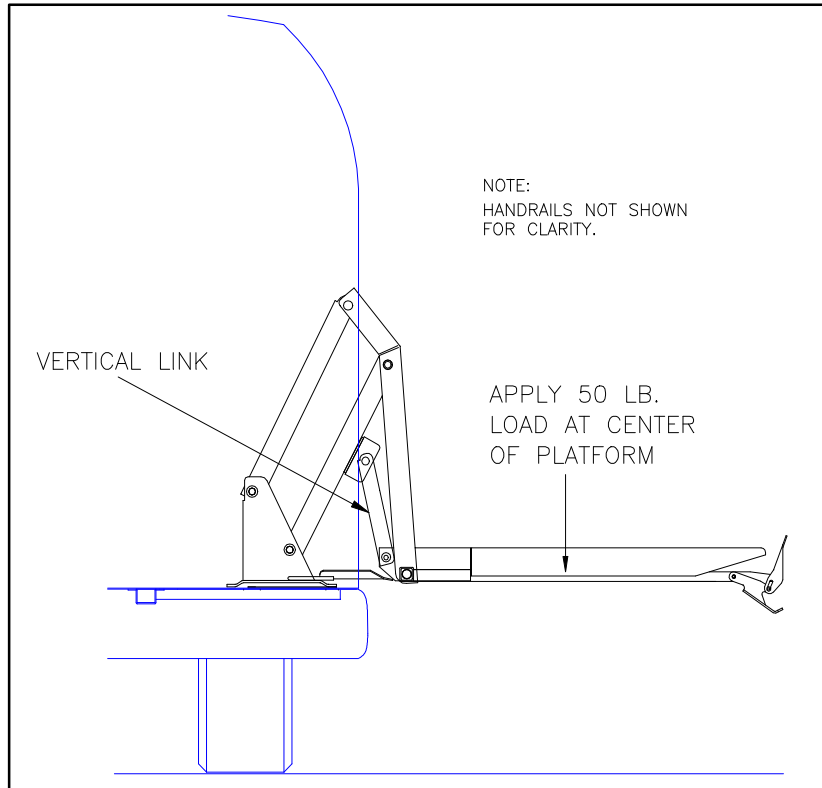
PRESSURE SWITCH TEST AT FLOOR LEVEL
